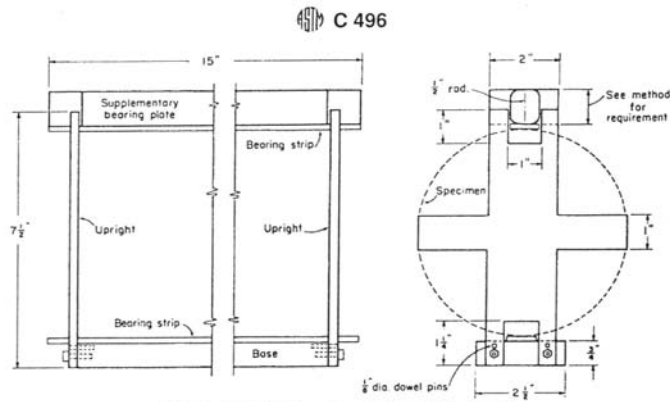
Detailed Plans for a Suitable Aligning Jig
